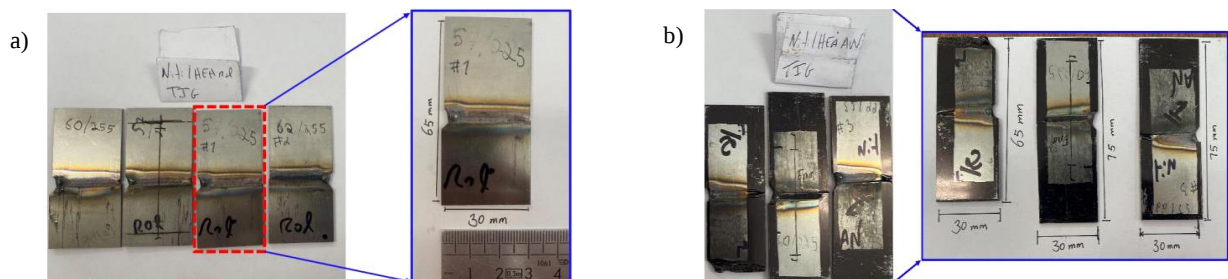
(a) As-rolled welded joint; (b) As-annealed welded joint
